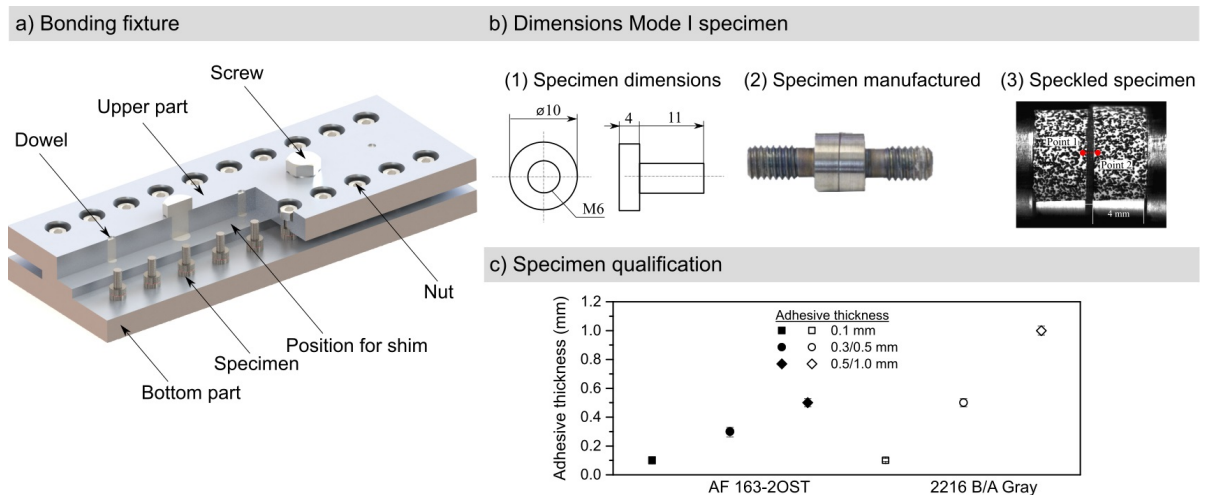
Overview of manufactured tools: a) bonding fixture, b) dimension, design and speckle application of specimen for mode I loading direction and c) bondline thickness qualification.
